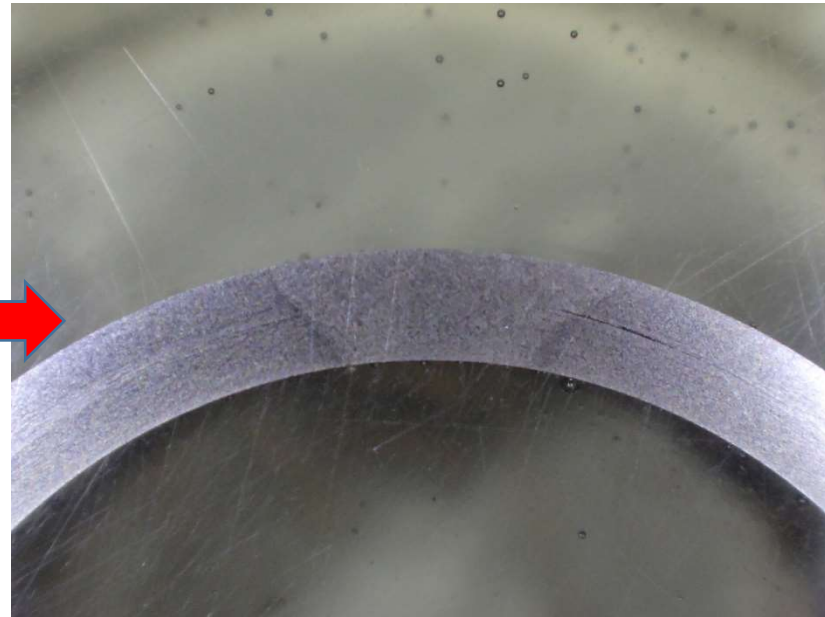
Welded 316 stainless steel ring. Etched with Stainless steel weld etch. The surface was mirror-polished.
